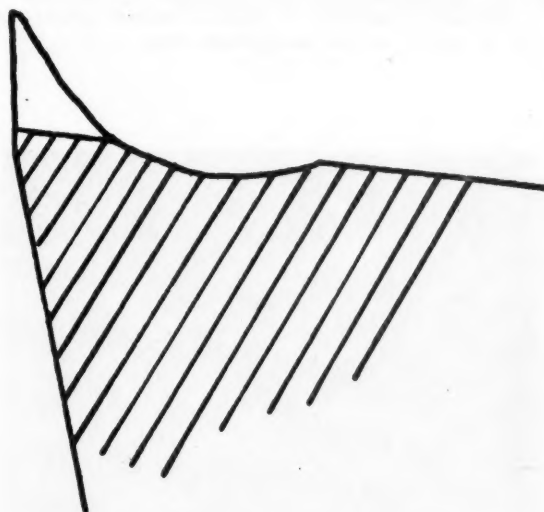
Built-up edge and grooving of rake surface at low cutting speed.
